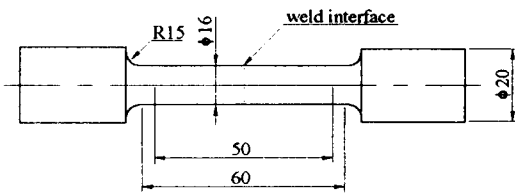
Specimen for tensile test of friction-welded interface
